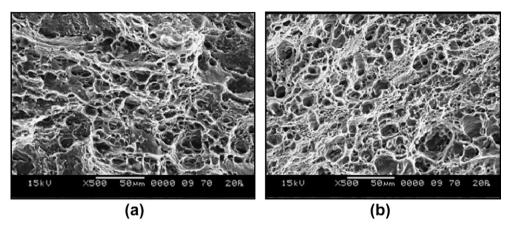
SEM fractographs of the weld centres of tensile tested specimens; (a) as-welded; (b) heat treated.
